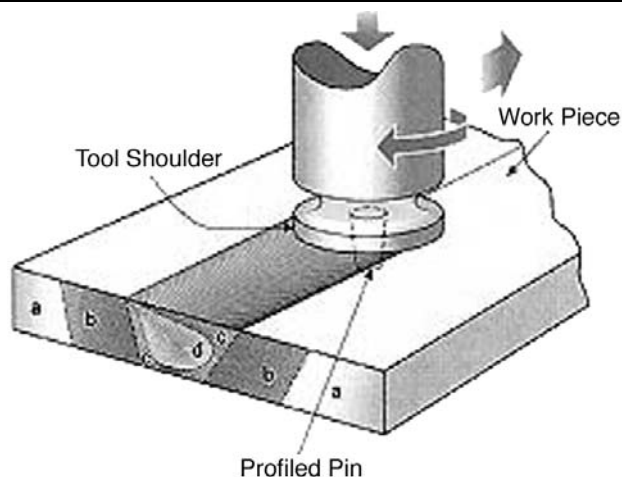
Friction stir joining and processing are accomplished by plunging a spinning tool into a material and translating the tool across the surface to form either a joint or a surface processed region (TWI, Ltd.).
